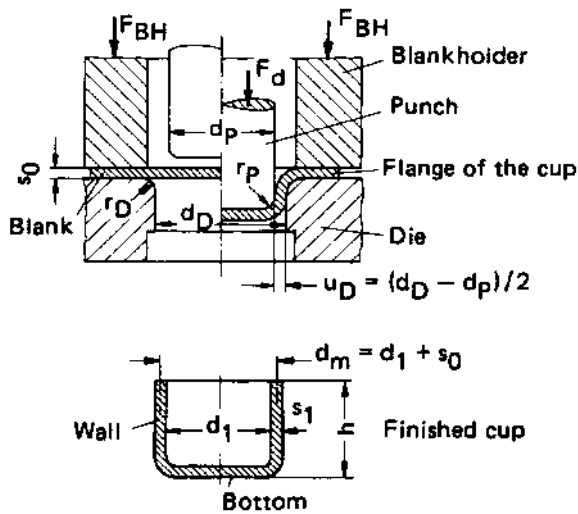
Deep drawing tool for a simple axisymmetric cup. (From Ref. 27.)
